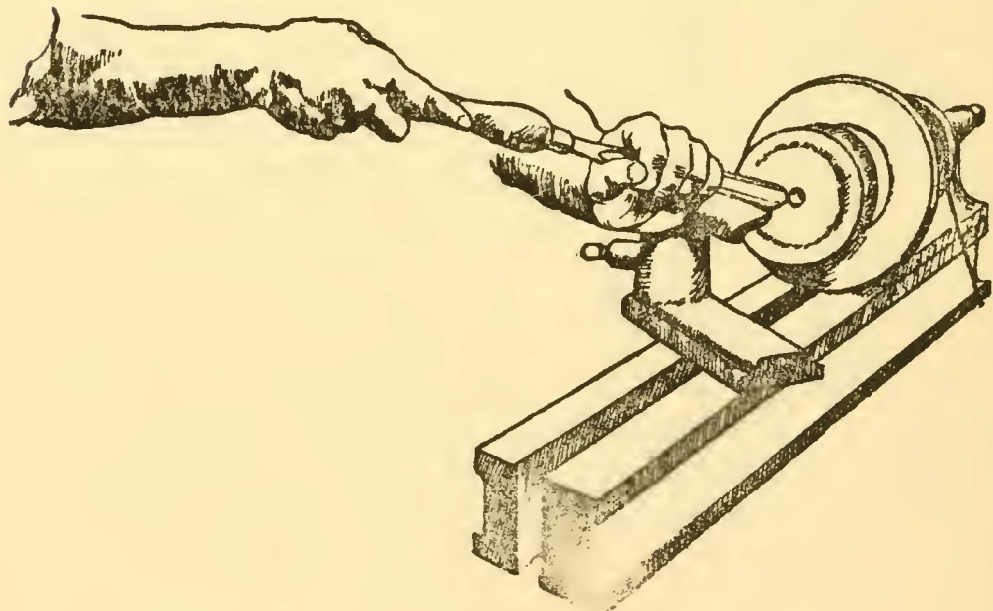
SHOWING POSITION OF TOOL (HELD SLIGHTLY DOWNWARDS) WHEN HOLLOWING.
